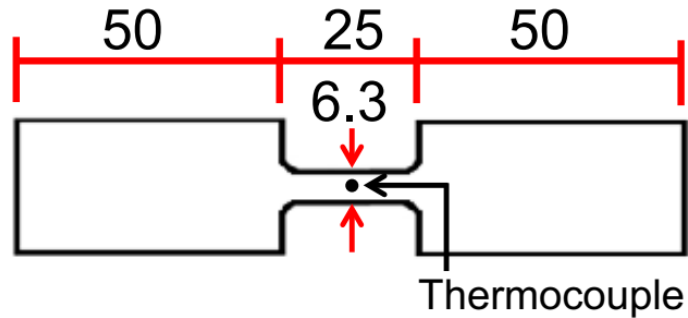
Drawings showing the sample dimensions used by the Di Ciano et al. [38], all units are in mm.
